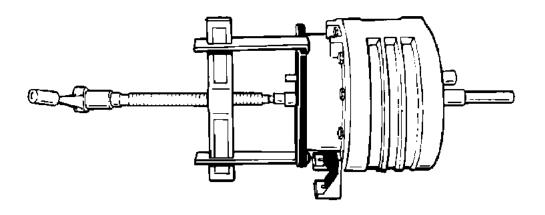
, page 16). After the headplate has been removed, detach the puller plate.
